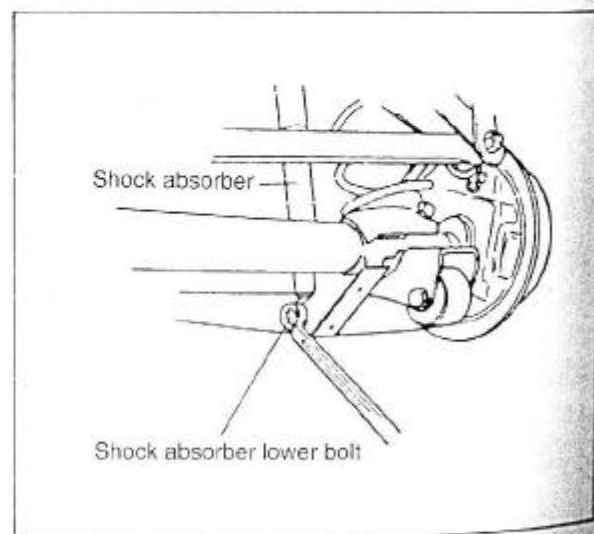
E — 6 REMOVAL OF SHOCK ABSORBER LOWER BOLT
